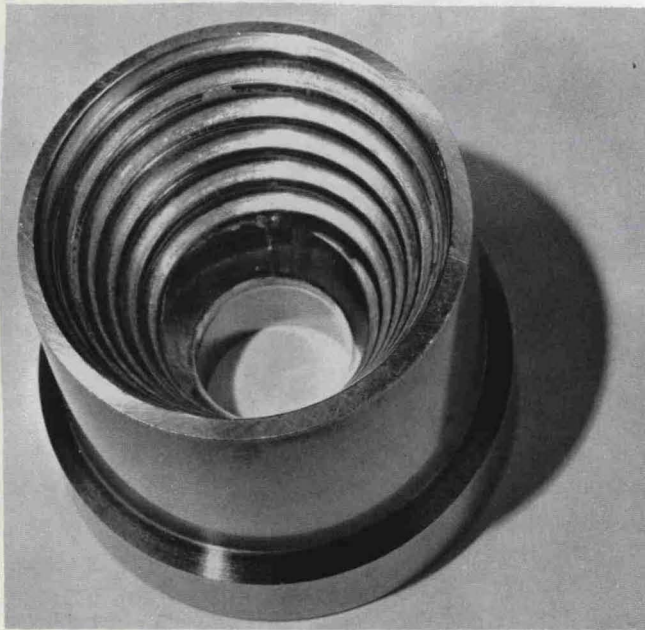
DIE DESIGN WITH HELICAL GROOVE IN CONICAL-ENTRY SURFACE
